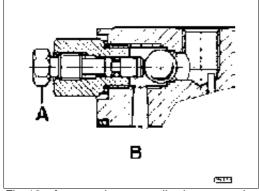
A conversion screw allowing conversion from double to single acting operation; B conversion screw lock washer.
